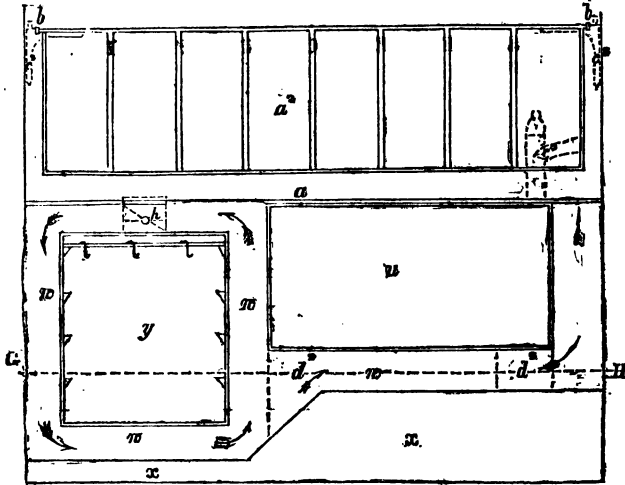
of the accompany engravings exhibits a top plan of this apparatus; fig. 2, a front elevation; fig. 3, a section on the line A B, of plan, fig. 6; fig. 4, a section on the line C D, of plan, fig. 6; fig. 5, a section on the line E F, of plan, fig. 6, with elevation of plate-warmer. And, fig. 6, plan on the line G H, of section, fig. 5.
